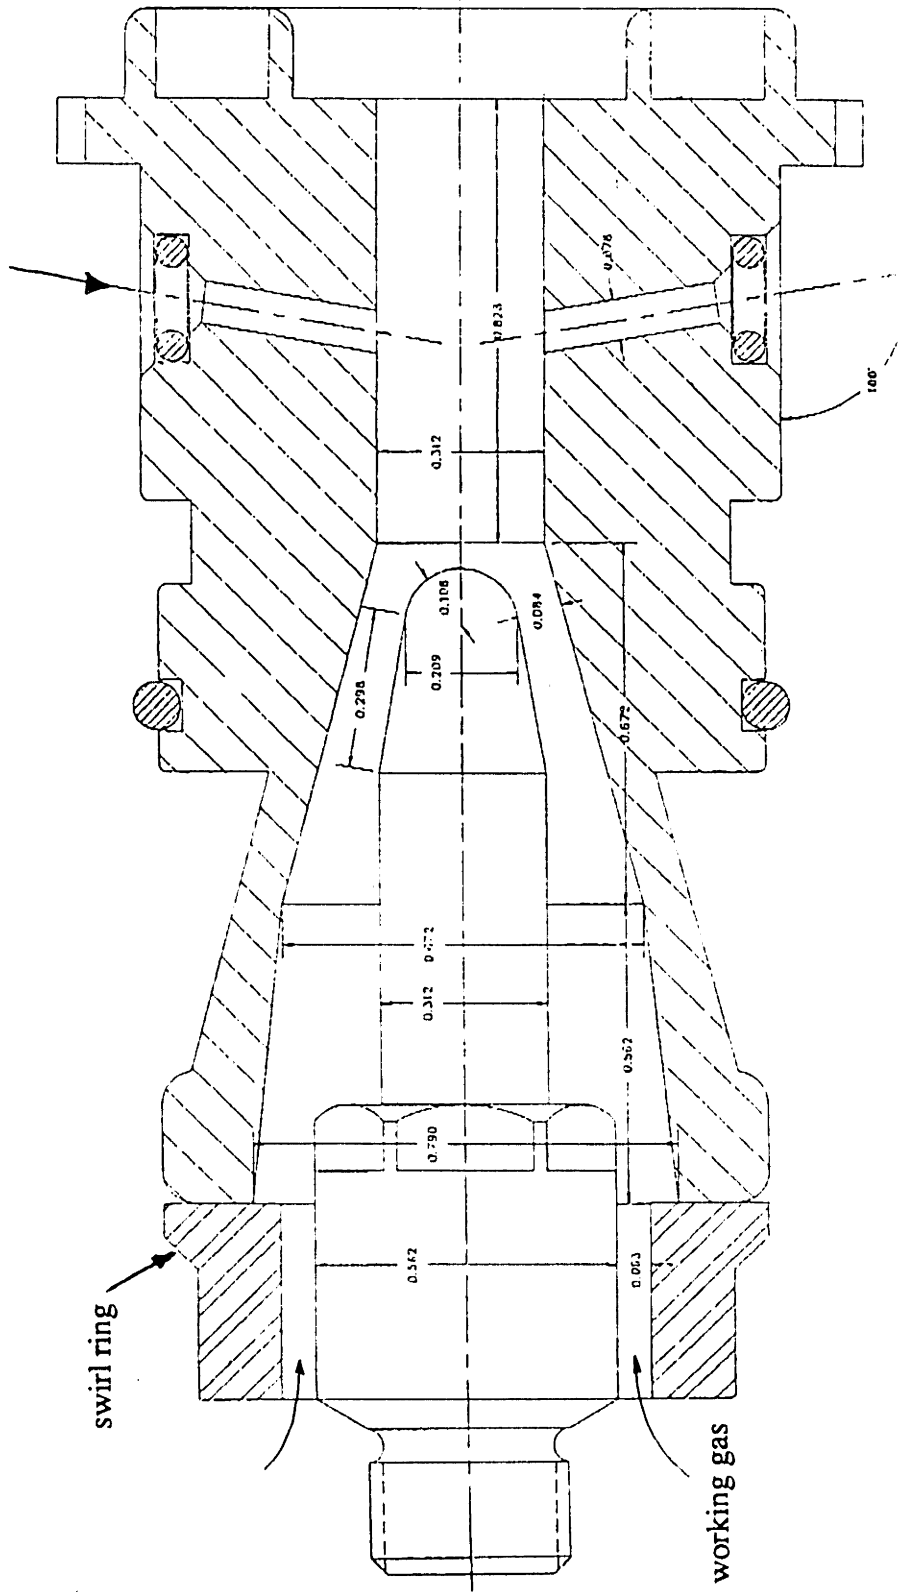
Cut-away view of the Miller SG-100 plasma torch (courtesy Miller Thermal, Inc. Tustin, CA)
